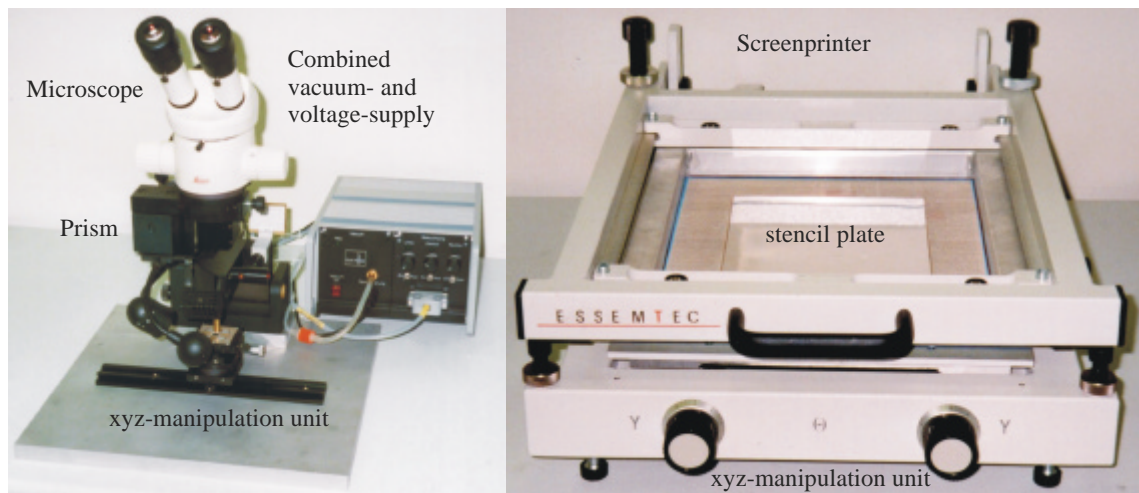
Set-up for flip-chip contacting the backside-contacted FET arrays and the EGE-chips. The whole set-up was arranged by Krause (2000). On the right side the screenprinter (ESSEMTEC SP-002, ESSEMTEC AG, Schweiz) can be seen, with which the epoxy bumps are made on the chip contacts. With the fineplacer unit (FINEPLACER-145 "PICO", FINTECH electronic, Germany) on the left side the chip and the PCB or the chip socket can be aligned and glued together.
